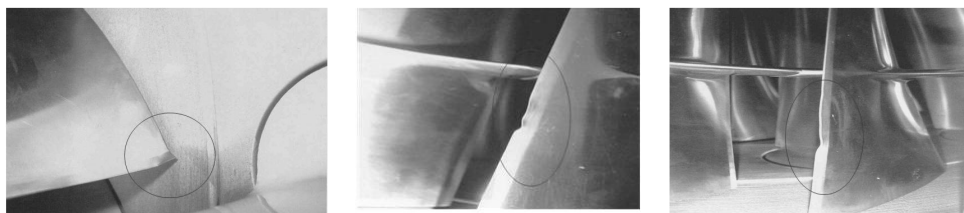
Damage to the blades of a SU-22 compressor after sucking contamination
